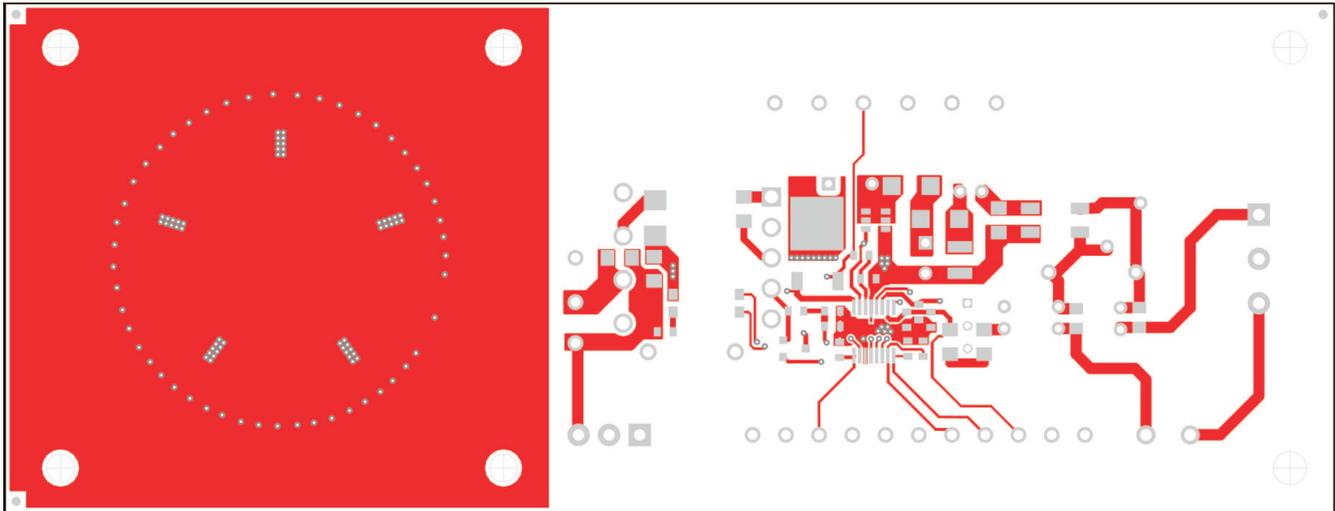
TPS92070EVM-682 Bottom Copper (bottom view)
